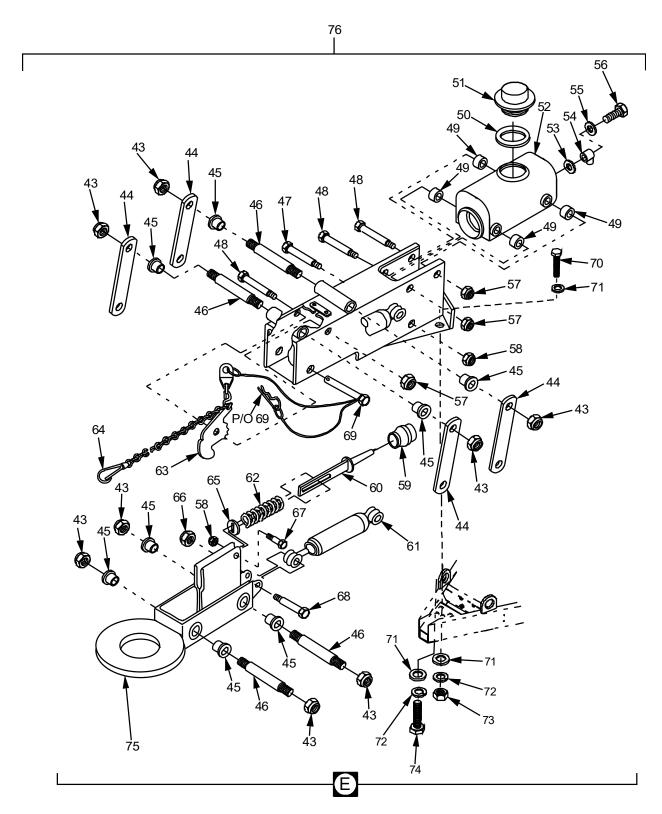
Chassis - Brake Installation, TG421-9006G, TG421-9006T (Sheet 5 of 5).
